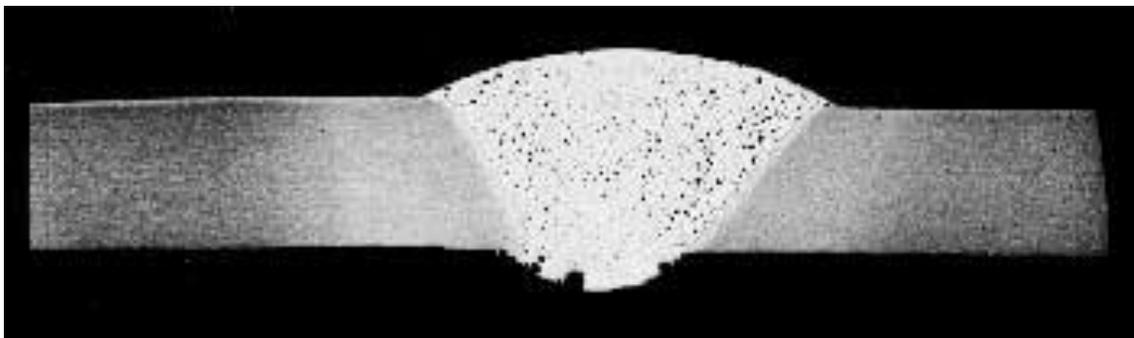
Finely distributed porosity in TIG plate butt weld²⁴
